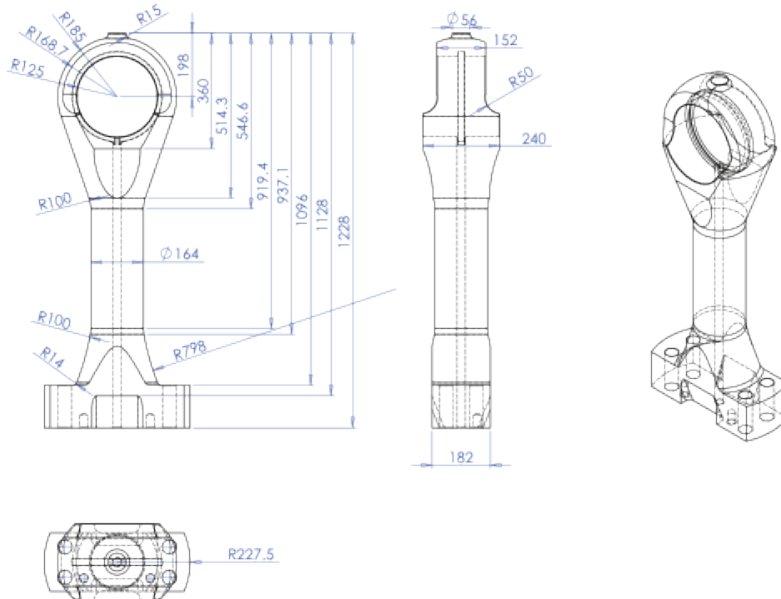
REDESIGNED CONNECTING ROD WITH MAJOR DIMENSIONS
